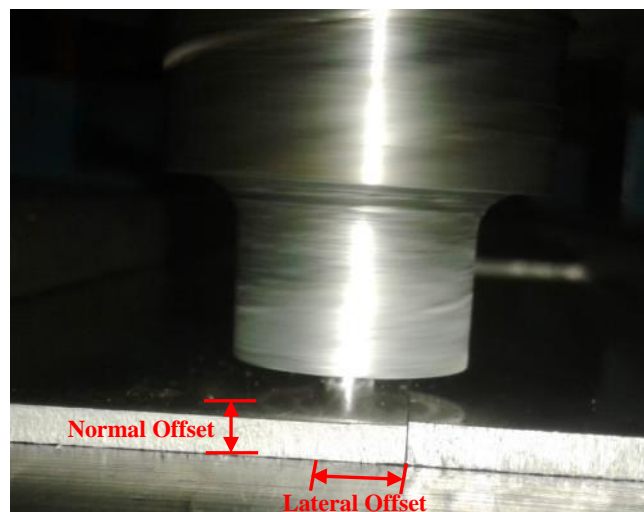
Example of Tool Offset during Friction Stir Welding
